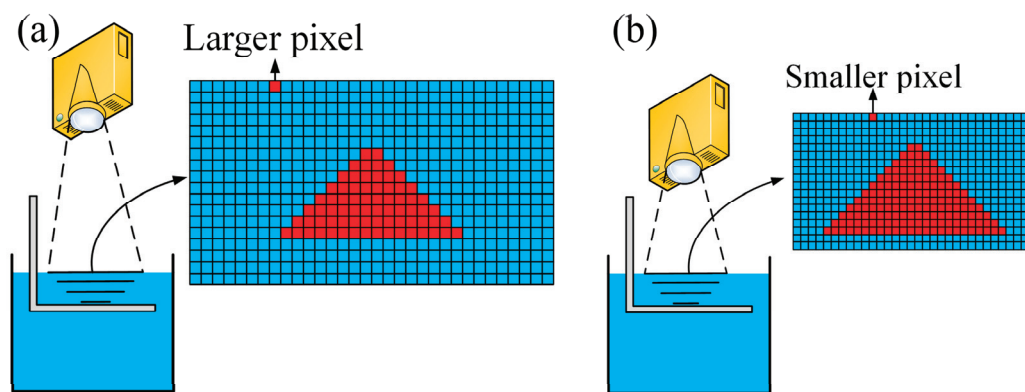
Schematic diagram of scalable DLP molding: (a) large-size printing; (b) small-feature printing.
